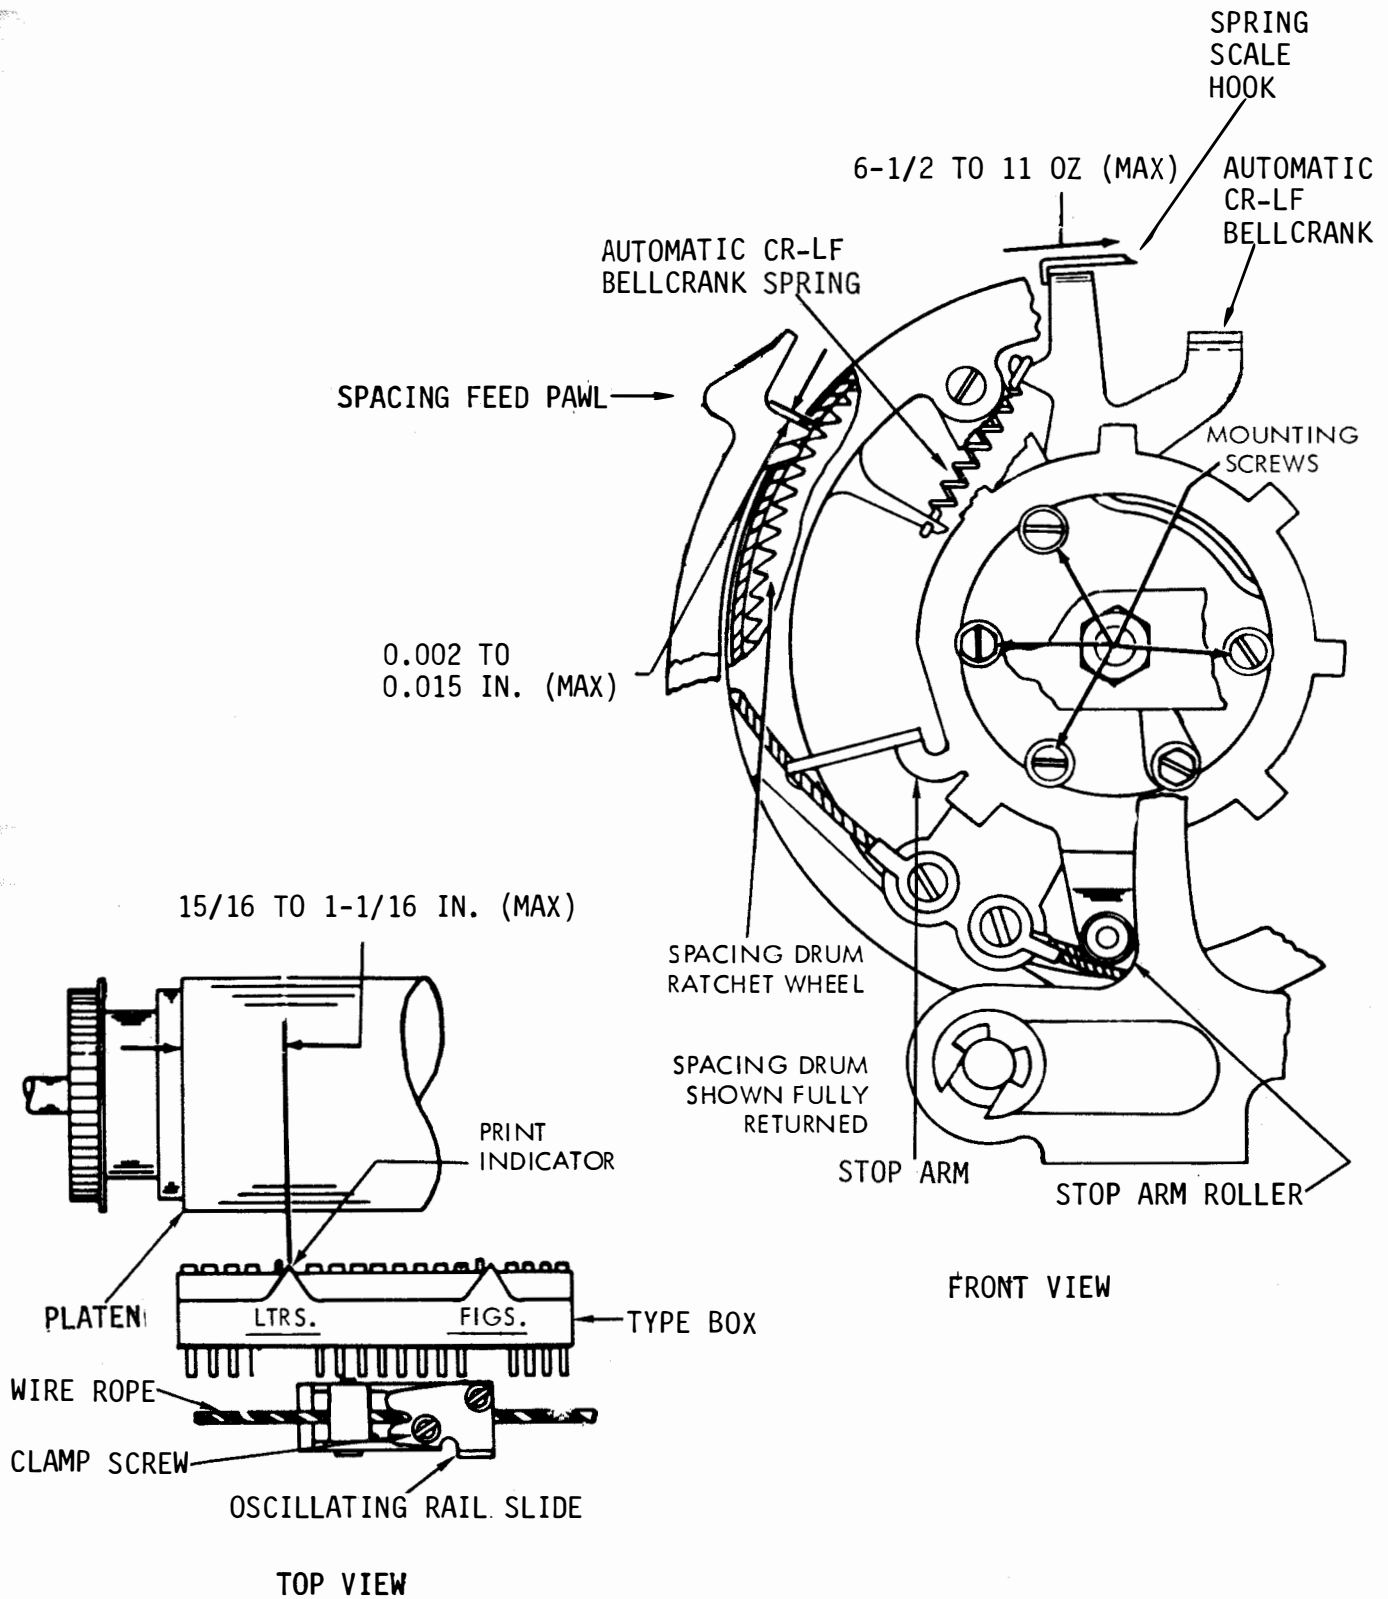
Automatic Carriage Return/Line-Feed Bellcrank Spring
